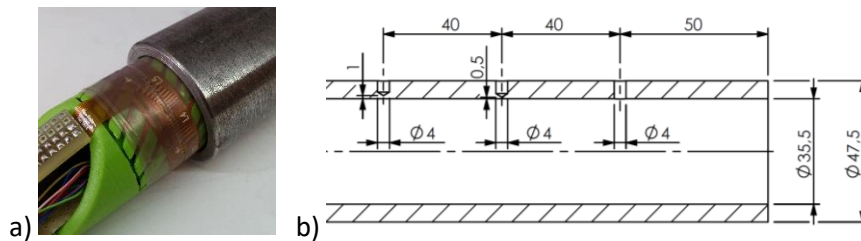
EC probe and steel sample; a) inner perimeter inspection probe; b) tube cut view with defects represented.
